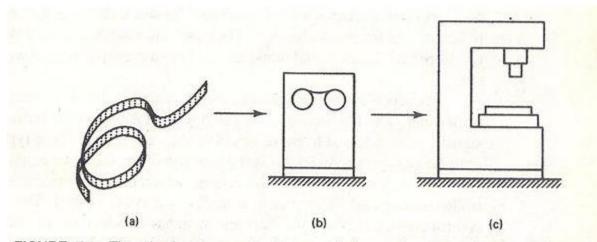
Three basic components of a numerical control system: (a) program of instruction; (b) controller unit; (c) machine tool.
